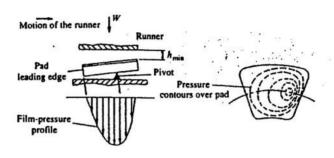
Generation of hydrodynamic pressure in tilting-pad thrust bearing
